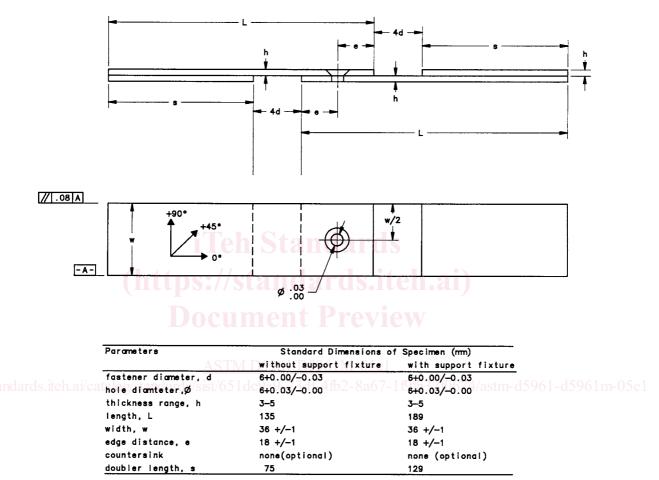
Single-Shear, Single-Fastener Test Specimen Drawing (SI) (See Fig. 7 for details of double-fastener version.)
